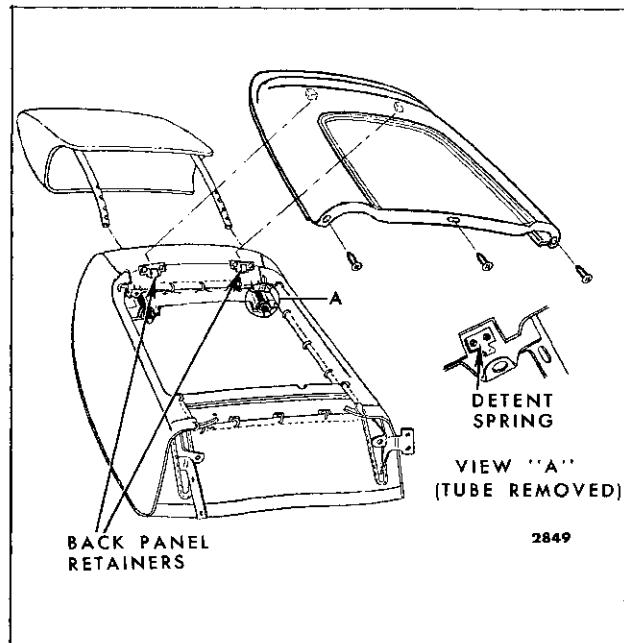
Strato Seat Back Panel and Head Restraint
